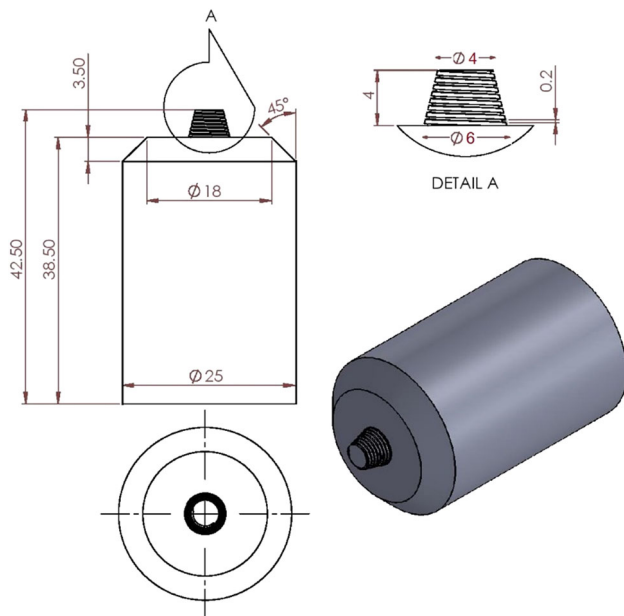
Schematic illustration of FSP tool (dimensions in mm)
